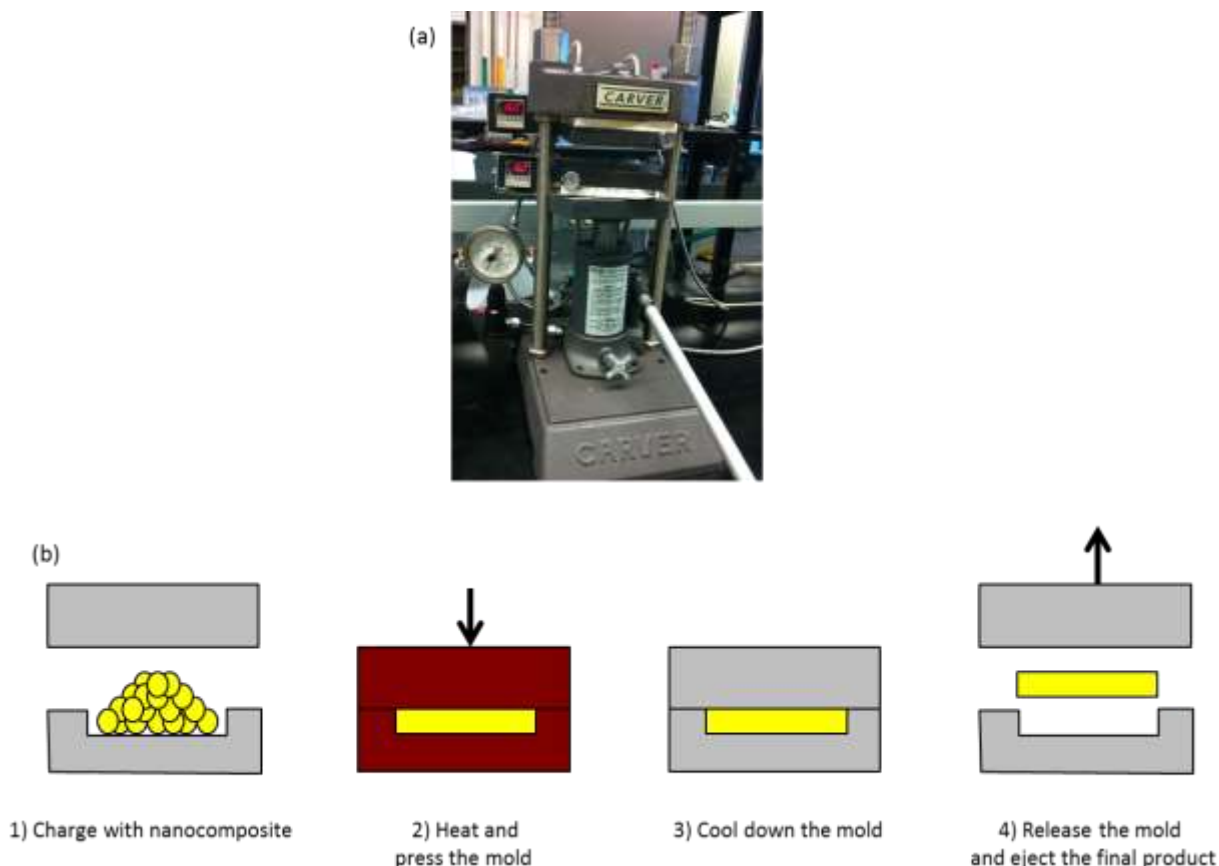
(a) Carver compression molding machine (Carver Inc., Wabash, IN, USA) (b) schematic of compression molding process
